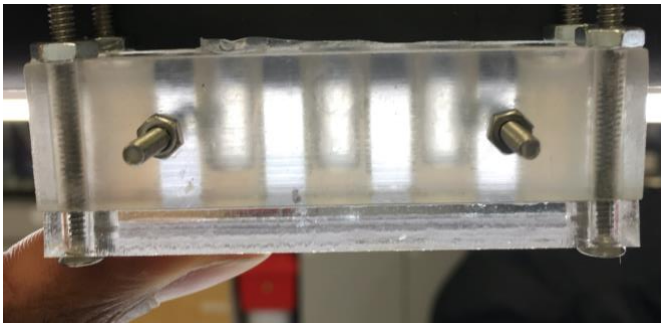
Pouring some ecoflex 30 into the assembled mold to seal one end of the mold
